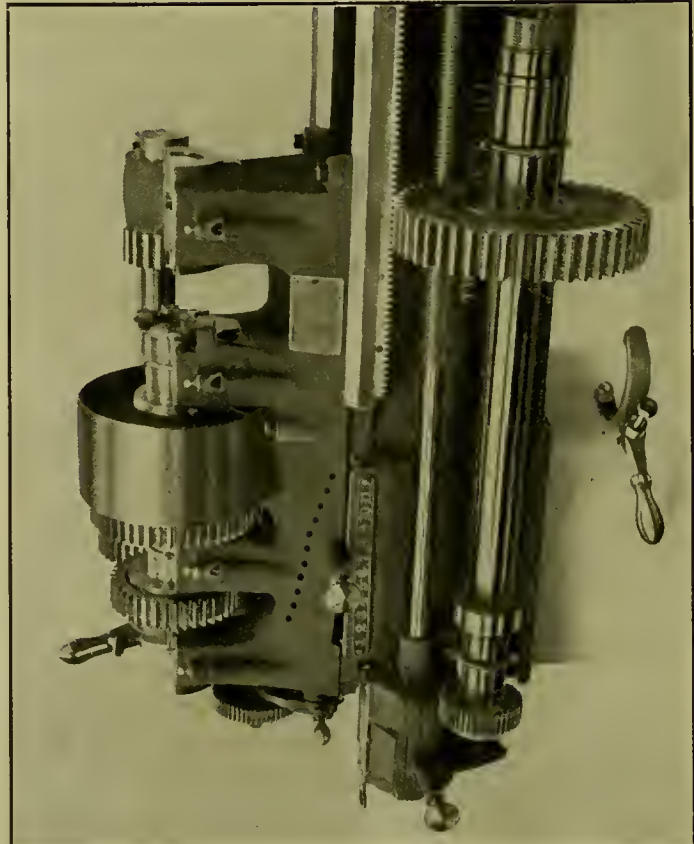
HEADSTOCK WITH SPINDLE REMOVED.
